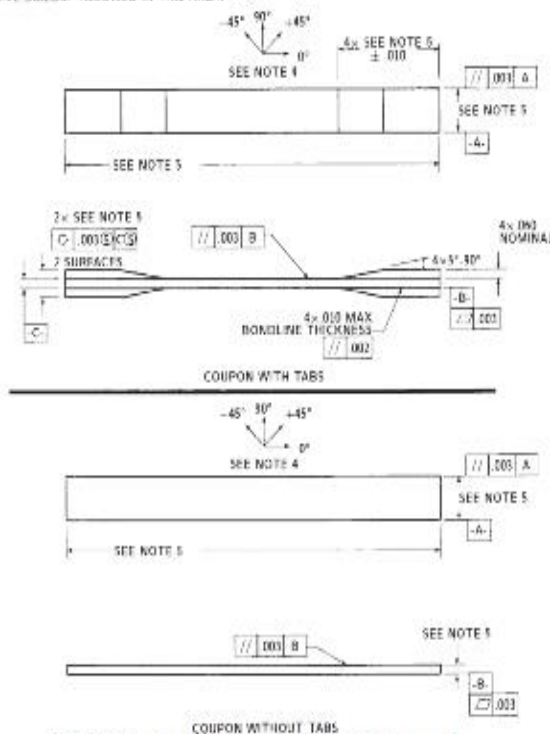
Tension Test Specimen Drawing (inch-pound)
